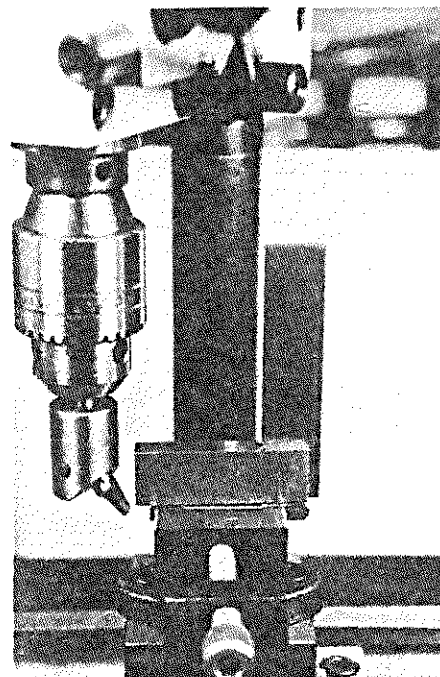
Checking the state of levelness of the upper verge bearing prior to milling with a fly cutter
